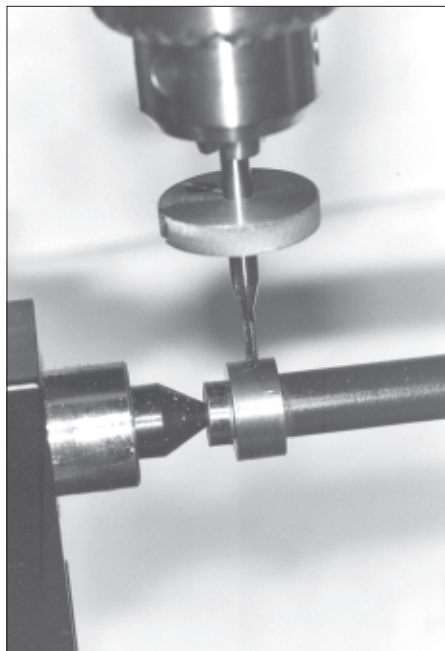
A tap size 0-80 held loosely in the mill chuck.
